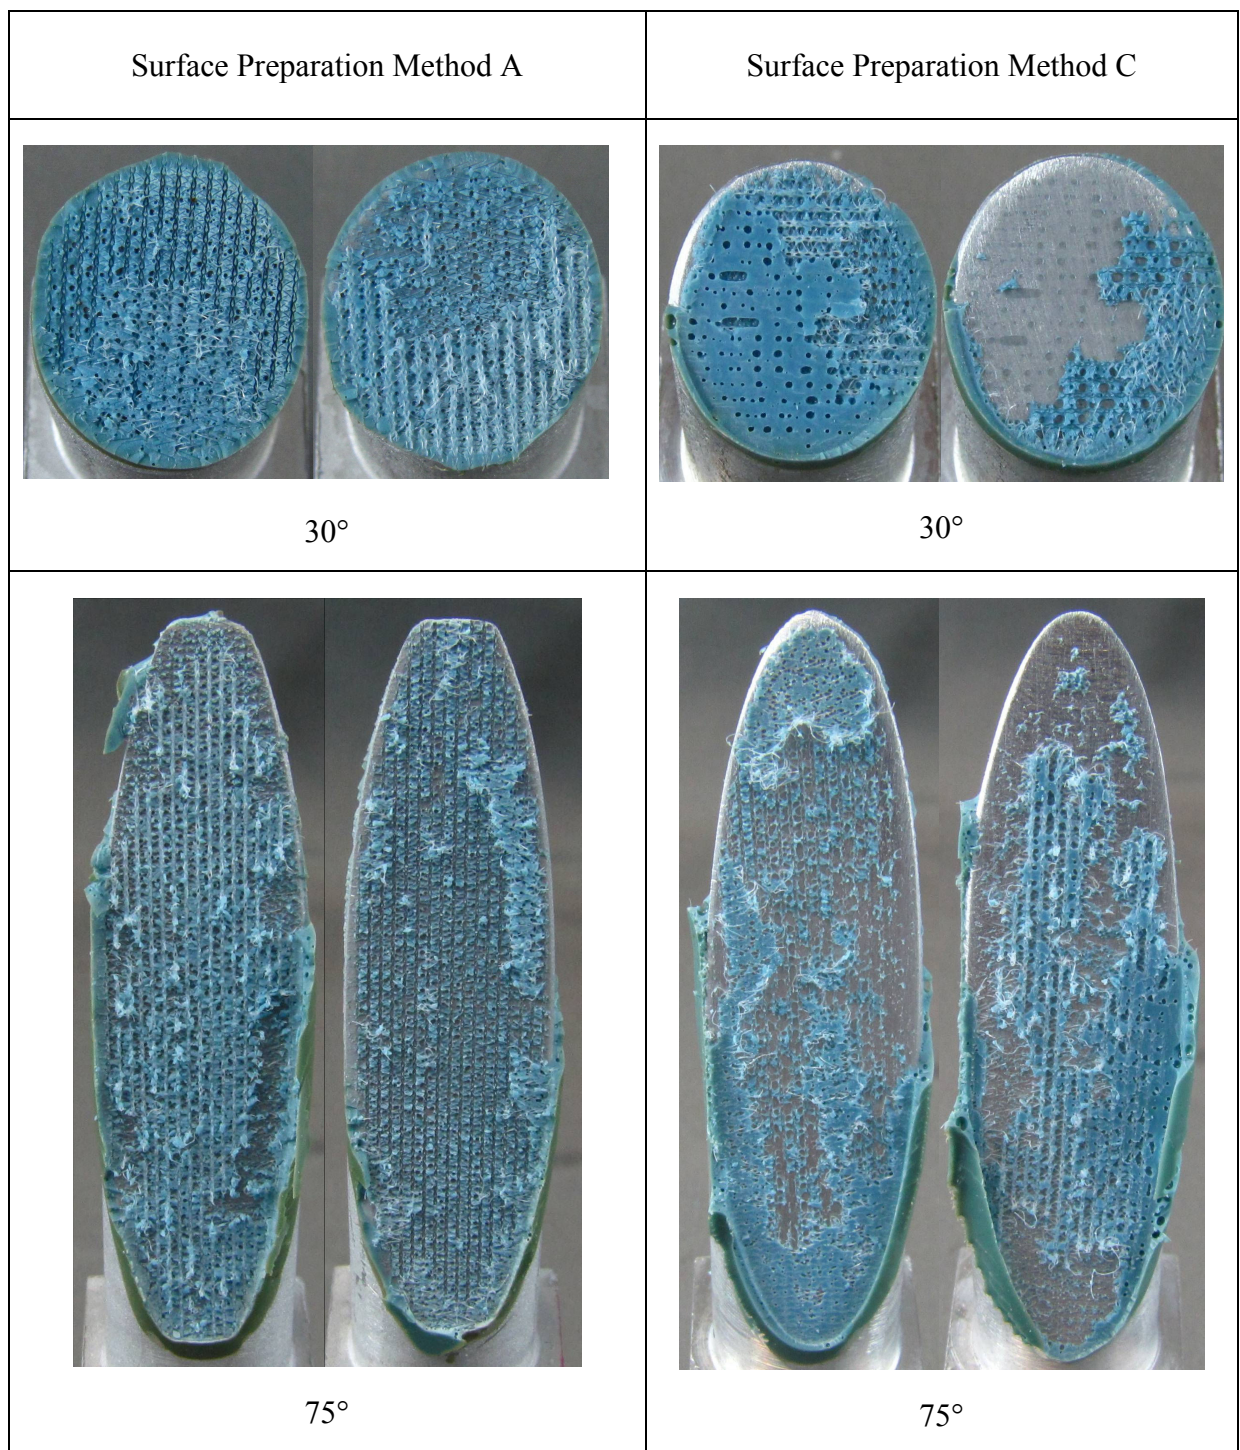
Typical fracture surfaces of the 30° and 75° conditioned scarf joints.
